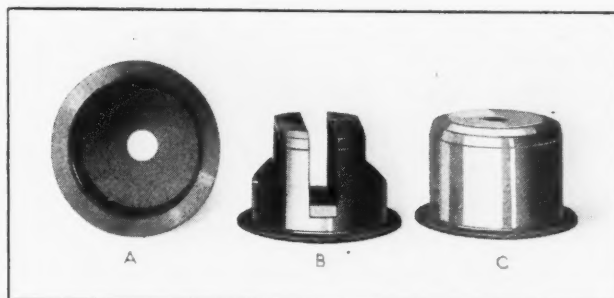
Drop-forged Cylinder Skirt Milled with Equipment Shown in Fig. 7
